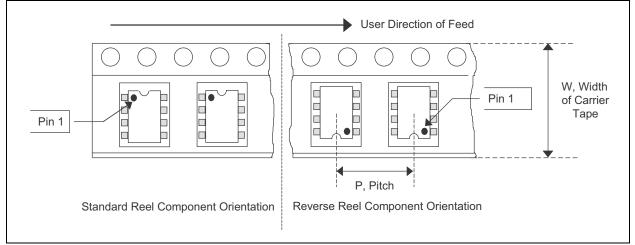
EMBOSSED CARRIER DIMENSIONS
